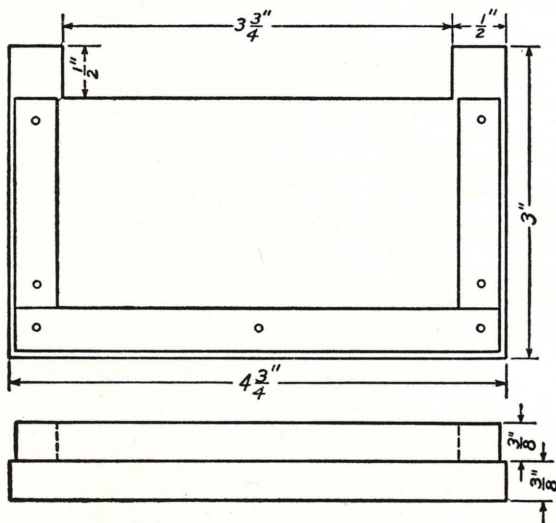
Layout for the base of the salt-and-pepper rack. The design used for the hot-pad holder can be used for the back
